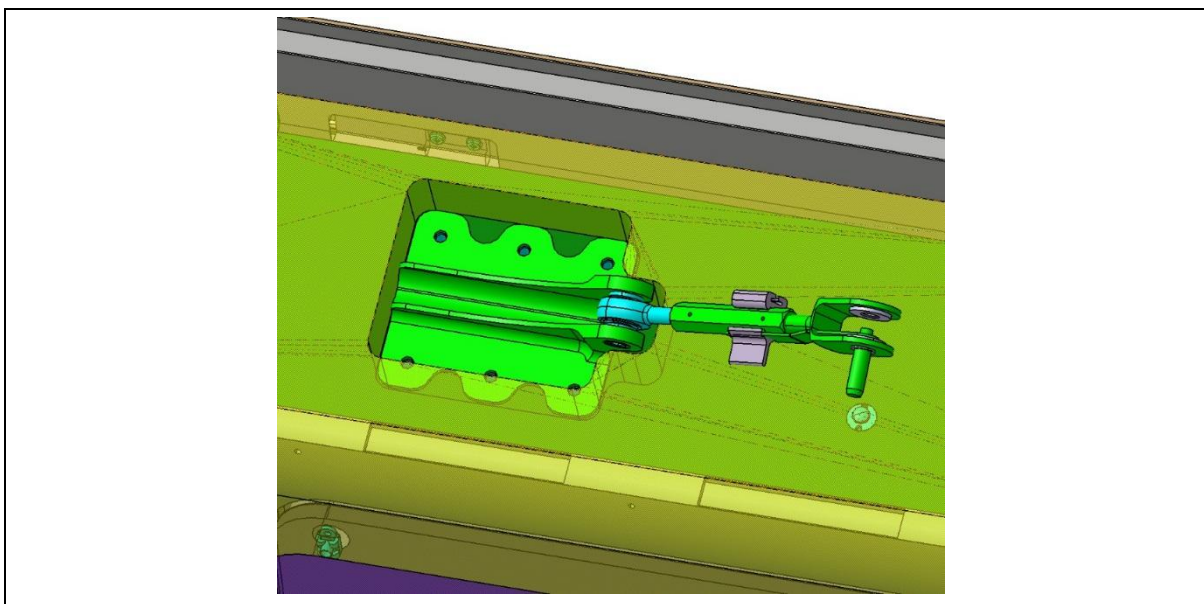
INSULATION CUT-OUT EXAMPLE
